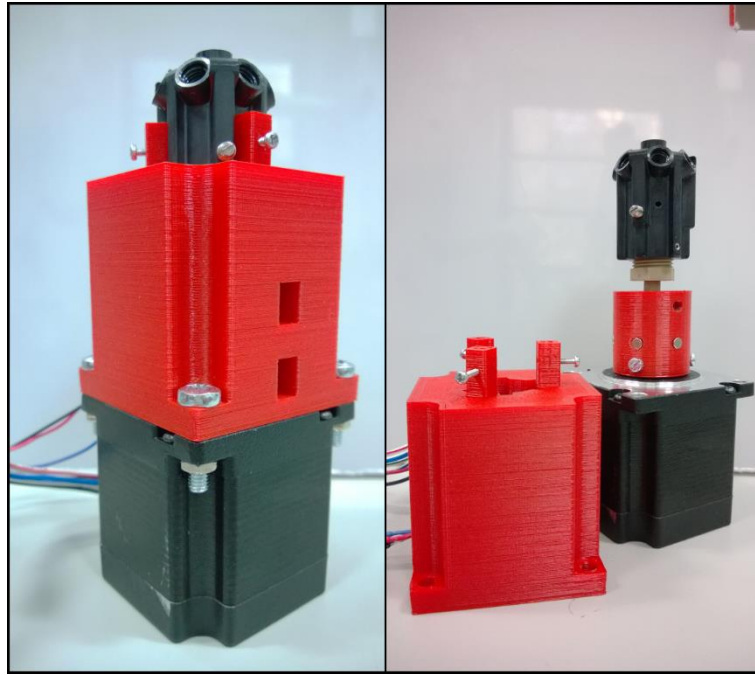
Early prototype of the six-way valve. Left: full assembly. Right: partially disassembled, showing the motor connector and the positioning magnets.
